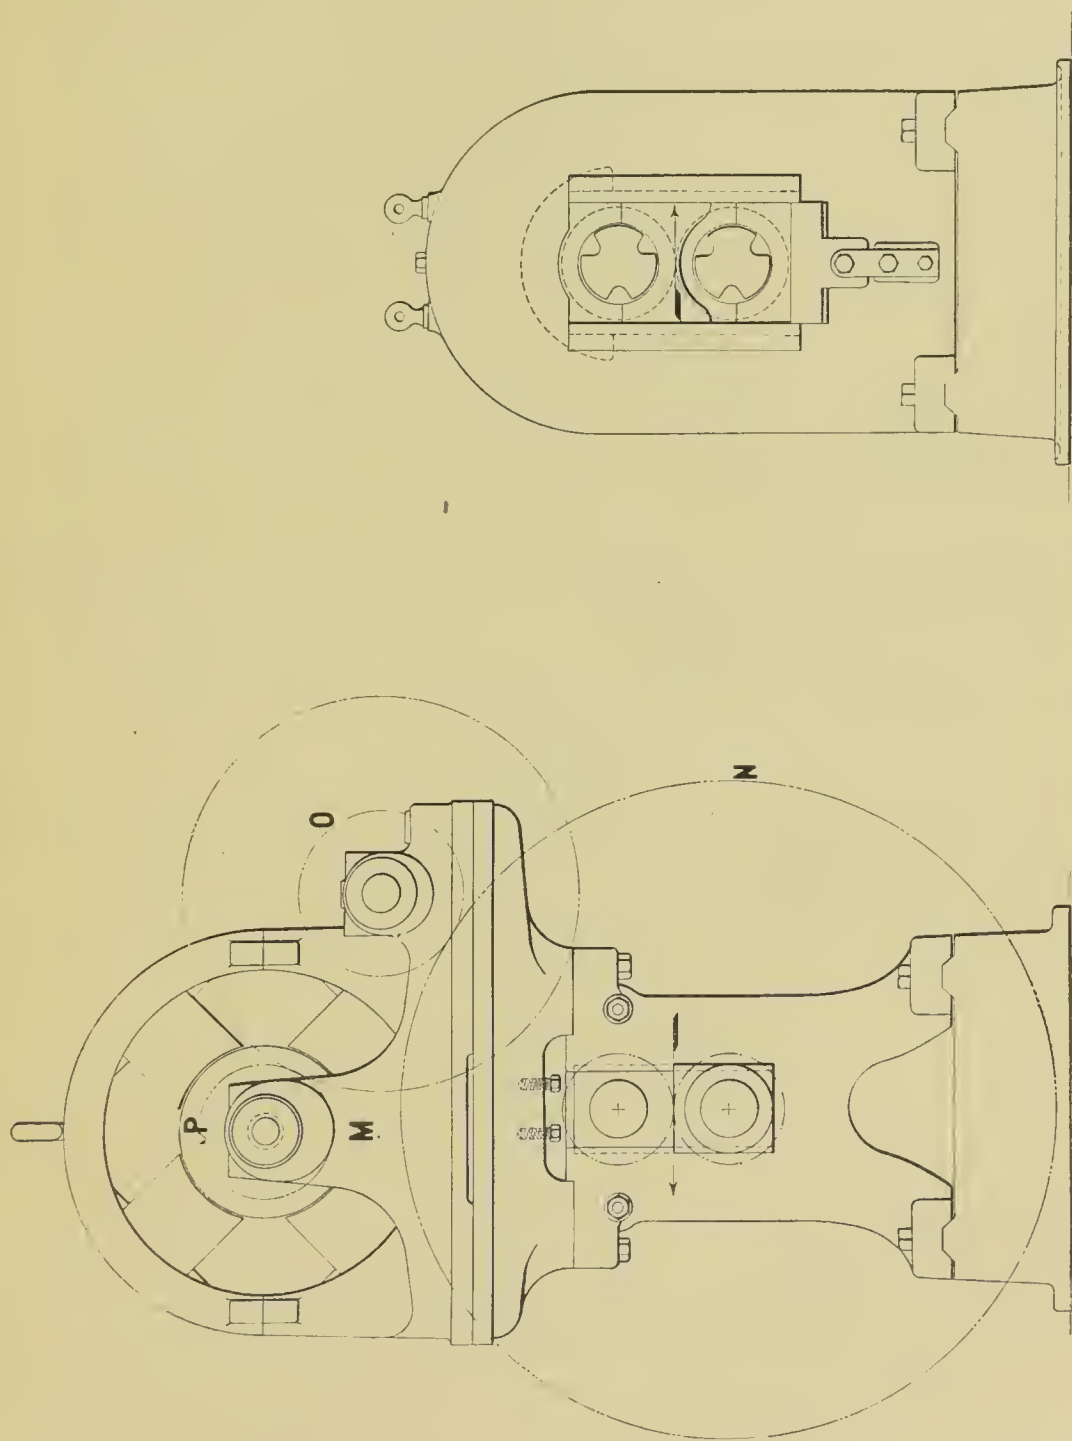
ROLLING MILL—SIDE VIEWS.
